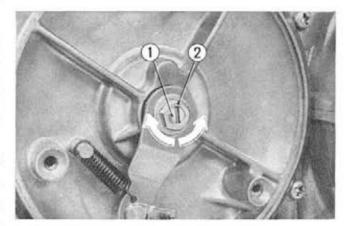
① Clutch adjusting screw ② Lock nut
